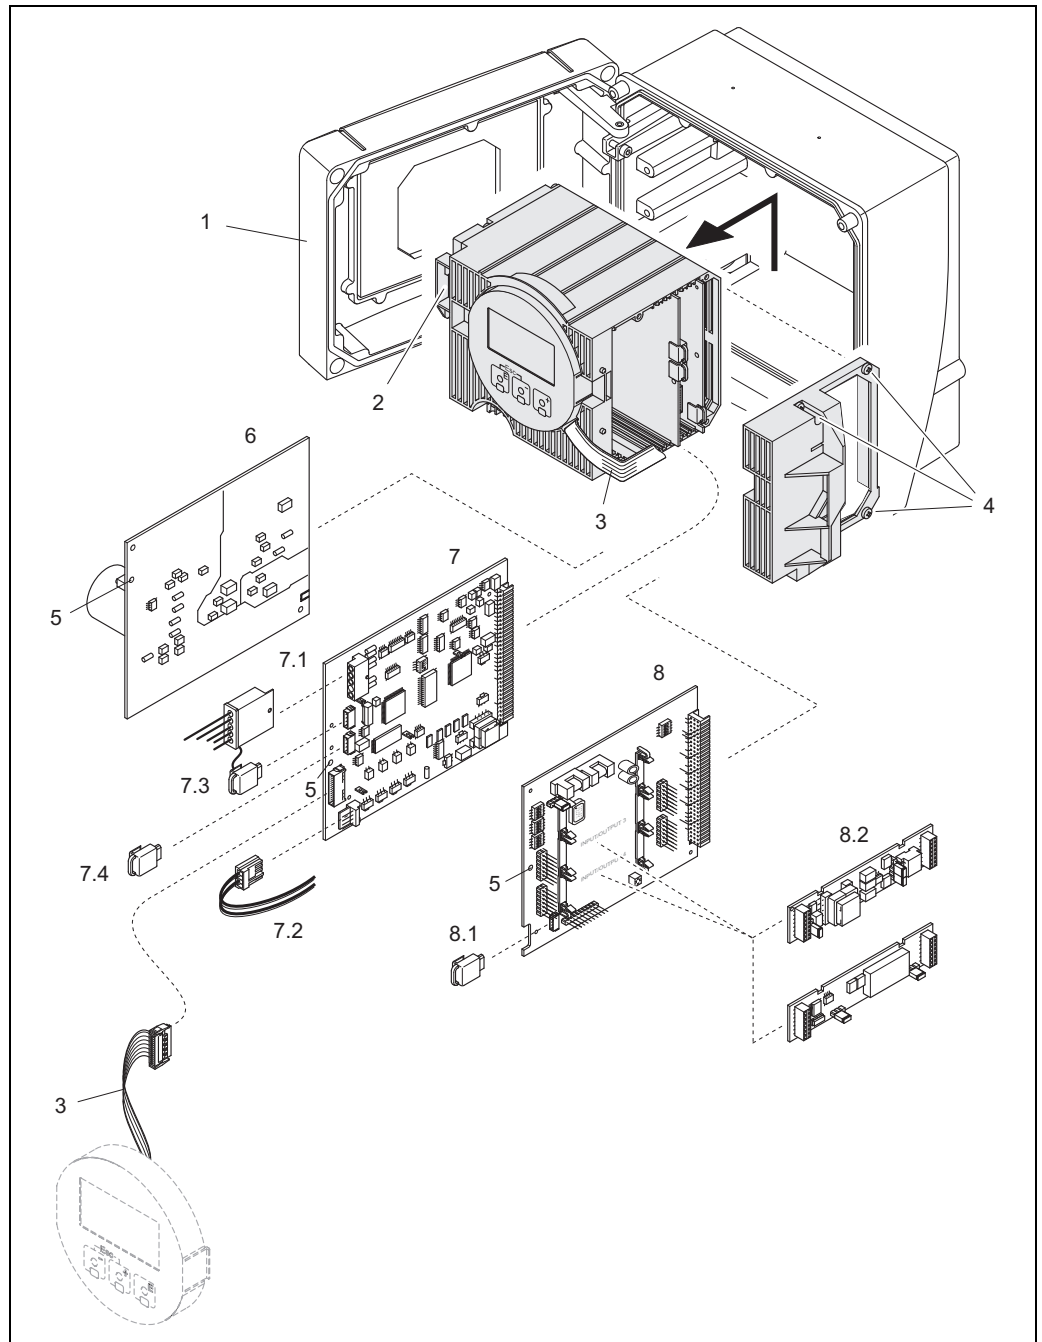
Wall-mount housing: removing and installing printed circuit boards
